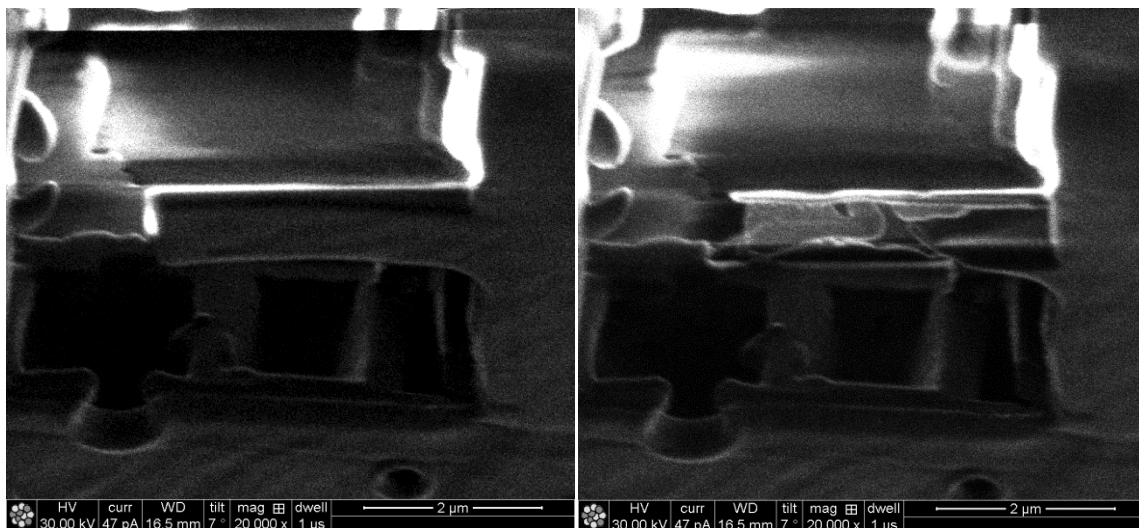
A milled notch with a depth interpreted to be 115,5 nm.
